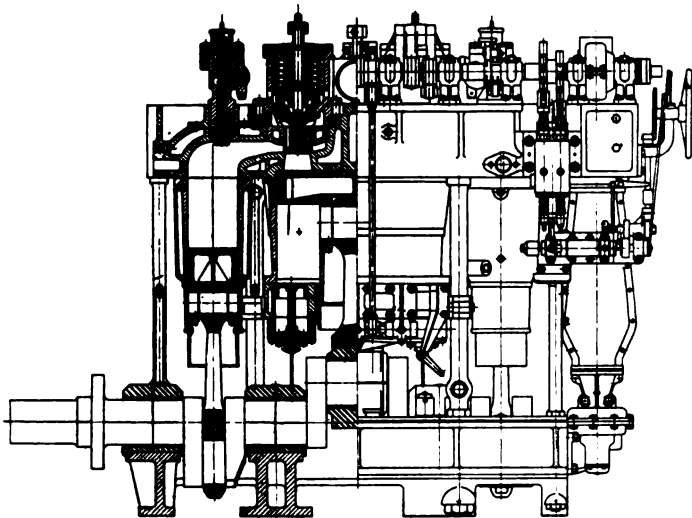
WORKING DRAWING PARTLY IN SECTION OF THE COMPOUND ENGINE SHOWN IN FIG. 26
